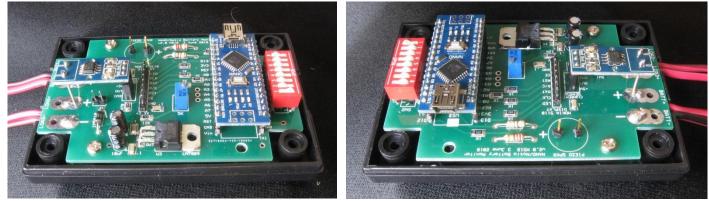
Side views of populated PC board, mounted into the bottom section of the plastic enclosure
